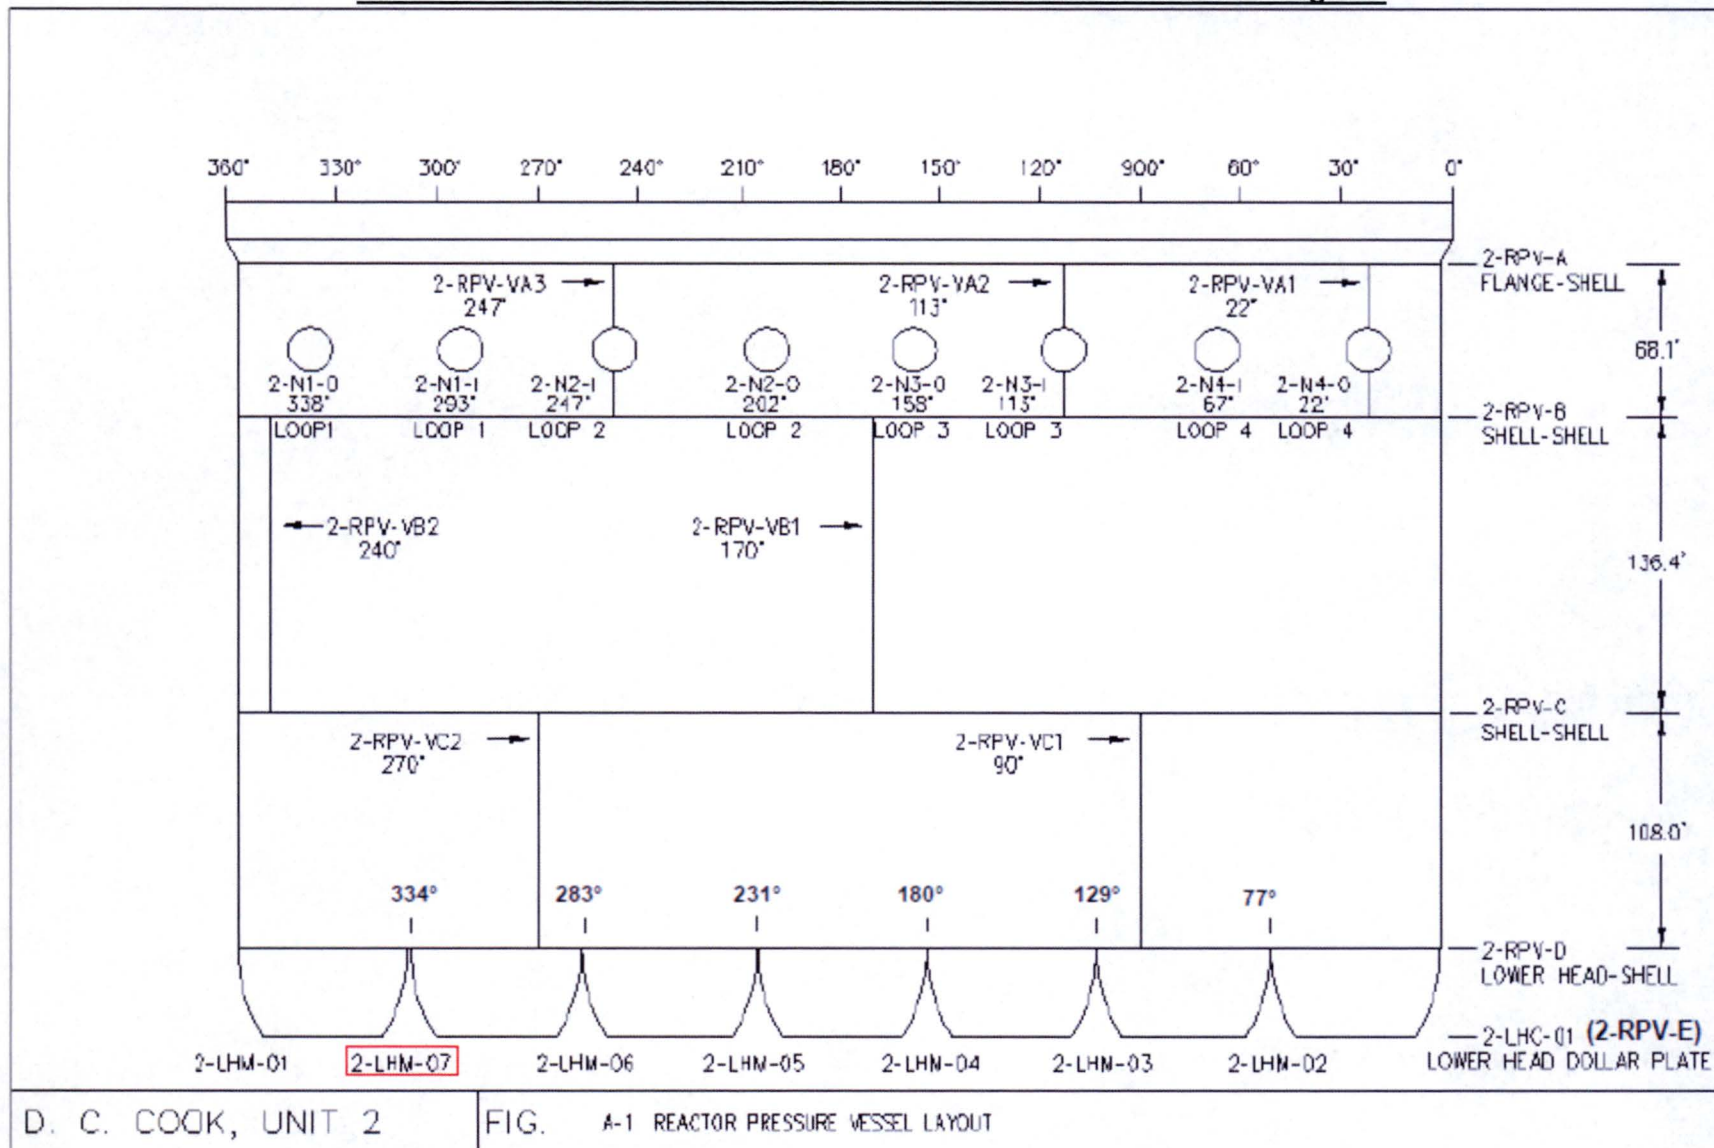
Weld 2-LHM-07 (Extracted from Reference DRAWING 2A-1)
